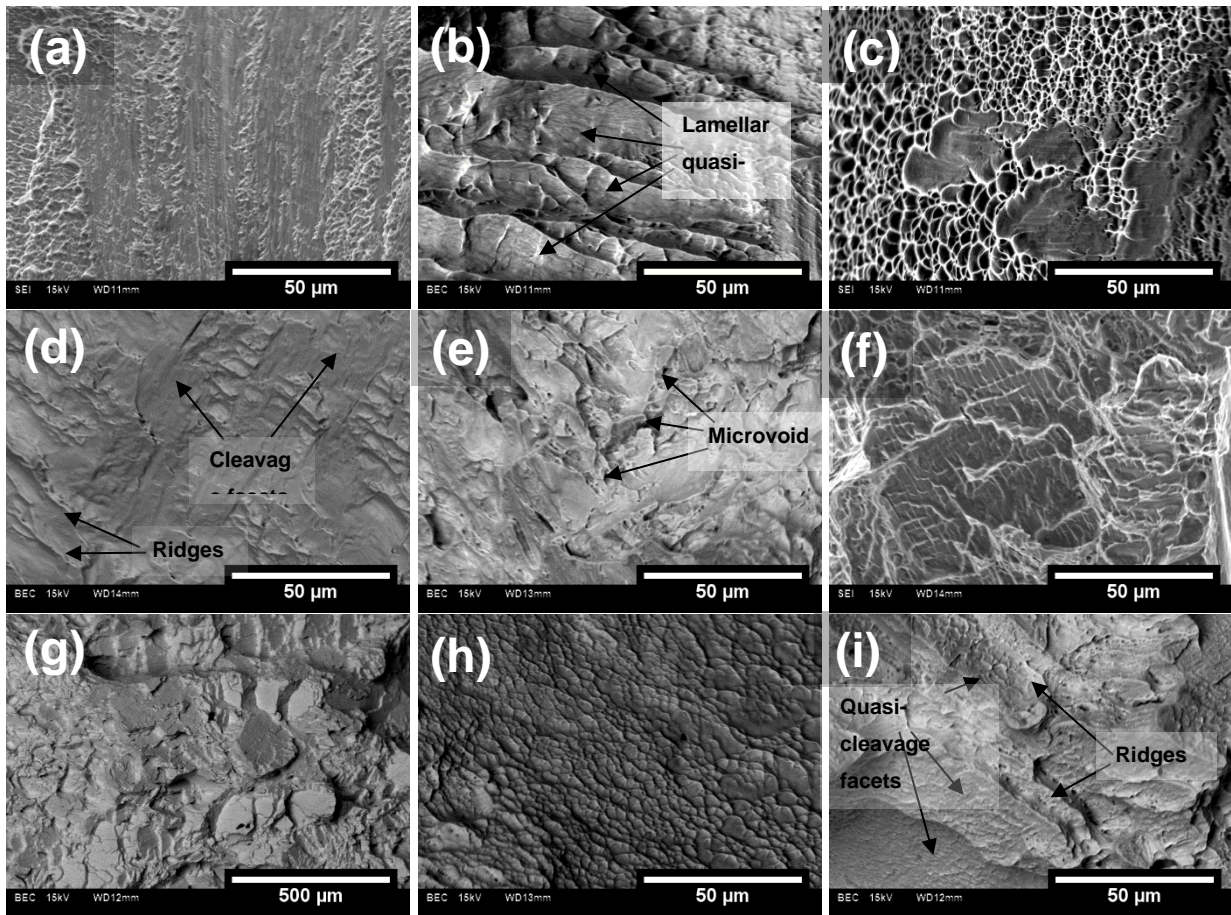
Fracture surfaces of a)-c) Wrought, d)-f) IC and g)-i) AM Ti6Al4V tensile specimens
